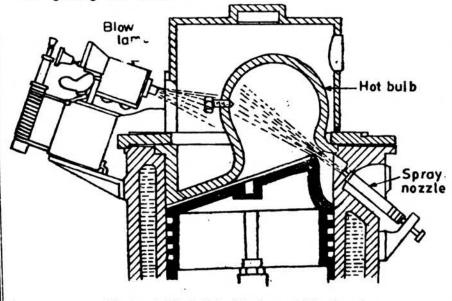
Hot bulb ignition in semi-Diesel engine.
